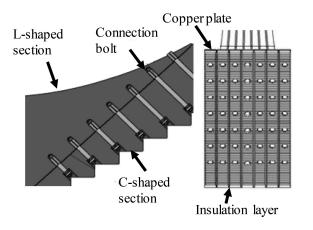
The connection between L-shaped center section and C-shaped outer section.
